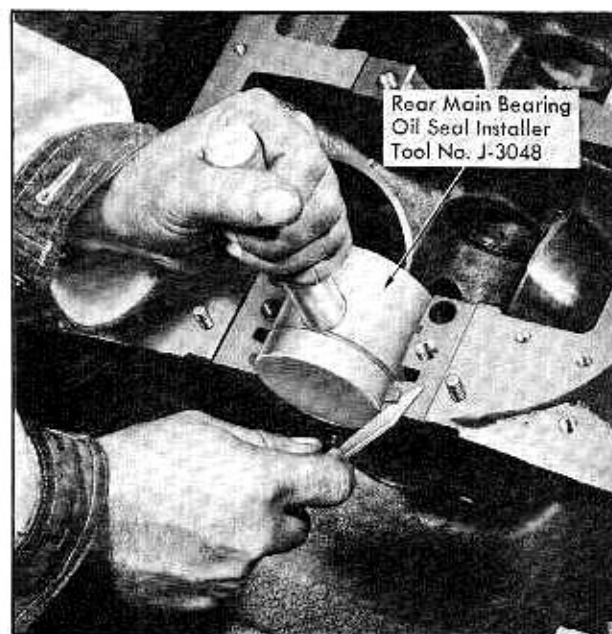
Cutting Rear Main Bearing Oil Seal
